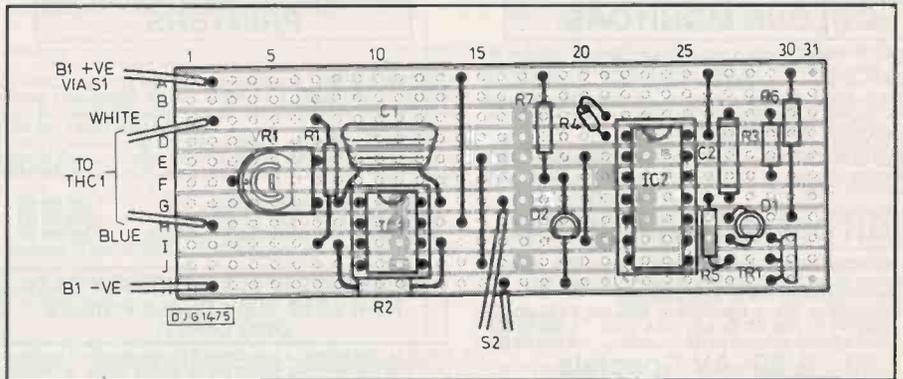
Circuit board layout. Carefully note the track cuts and solder blob links between some tracks.
